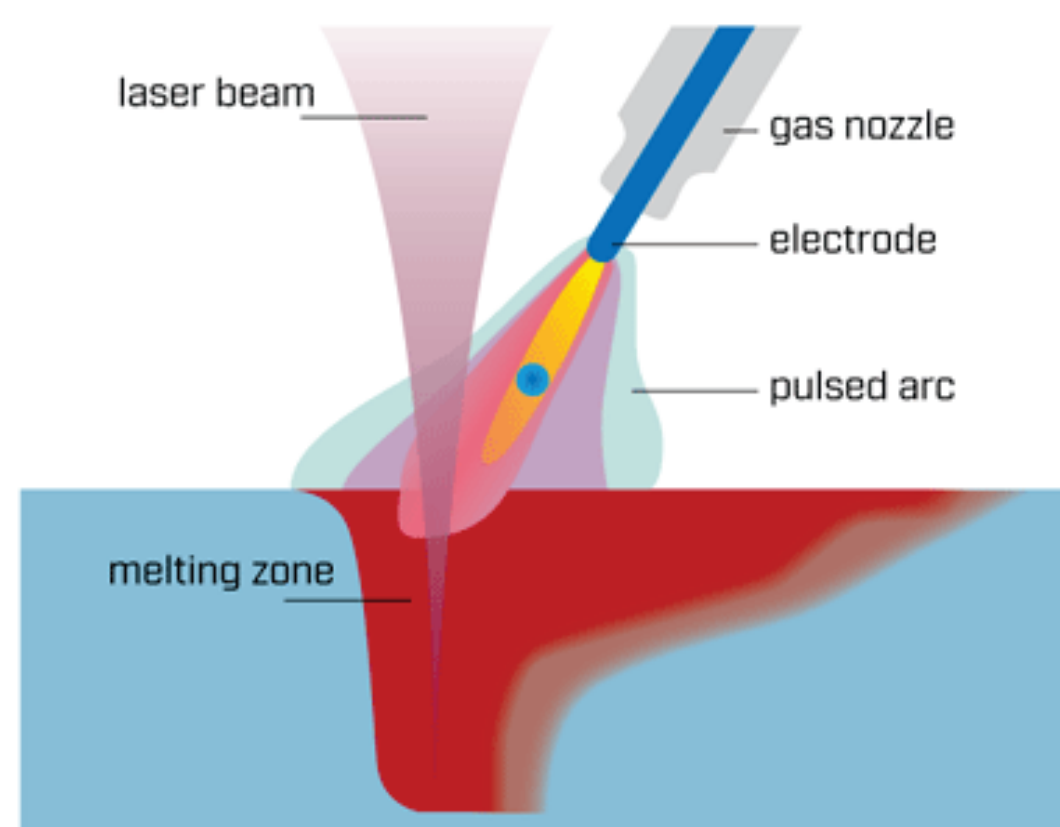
The basic principle the laser-arc hybrid welding.
